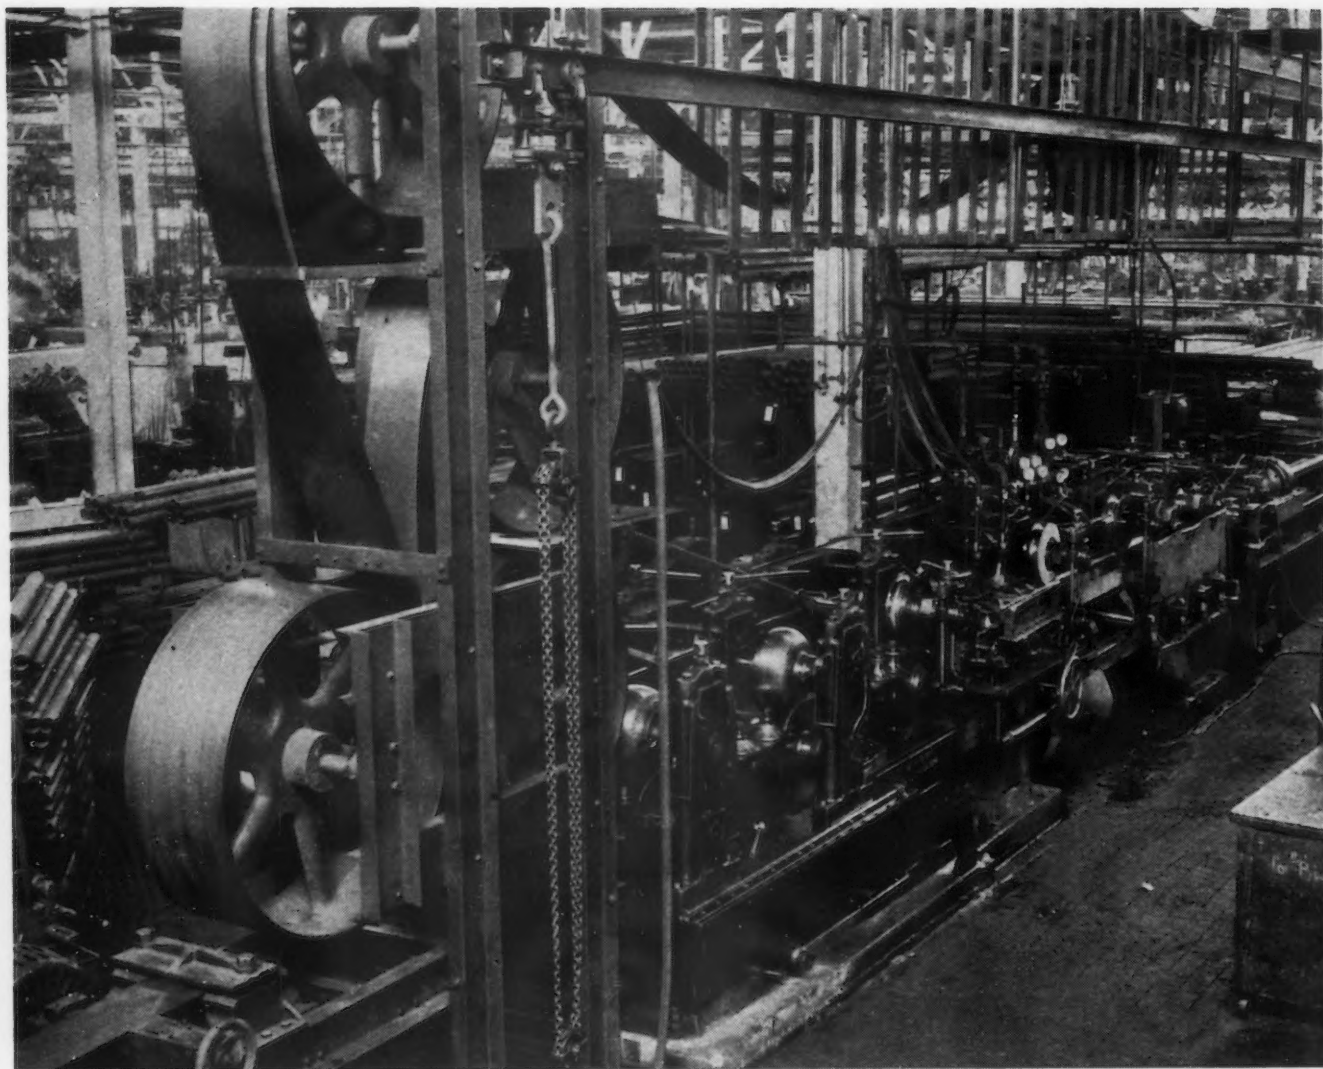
Continuous tube welding mill, showing compensator loop of strip on overhead carrier, which is fed into mill while a fresh coil is joined to the end of preceding coil. Oxyacetylene welding is uninterrupted.
